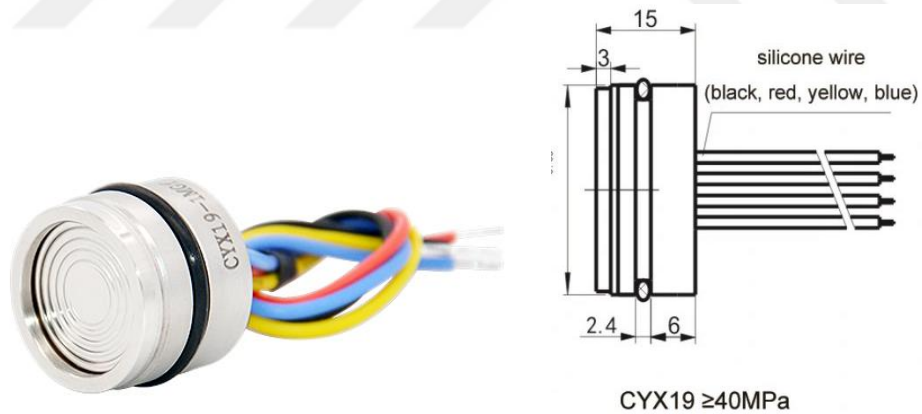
PS-01 and technical drawing (CYX19-32 series oil injection core pressure sensor)
